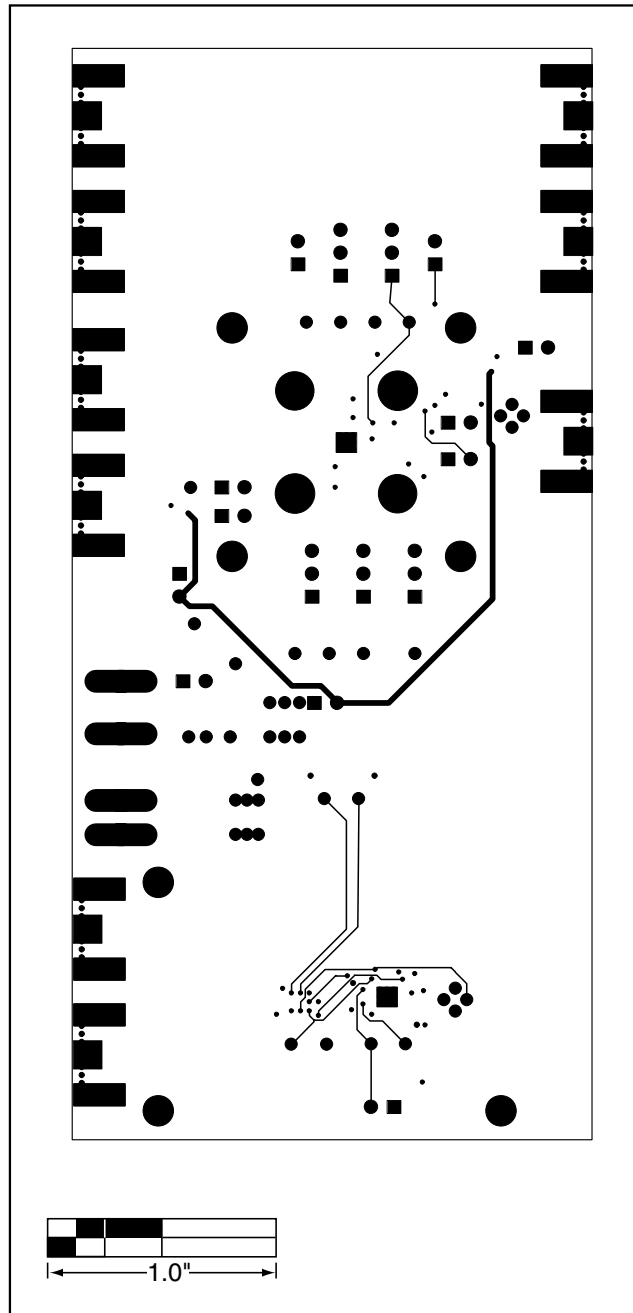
MAX3740 EV Kit PC Board Layout—Solder Side
